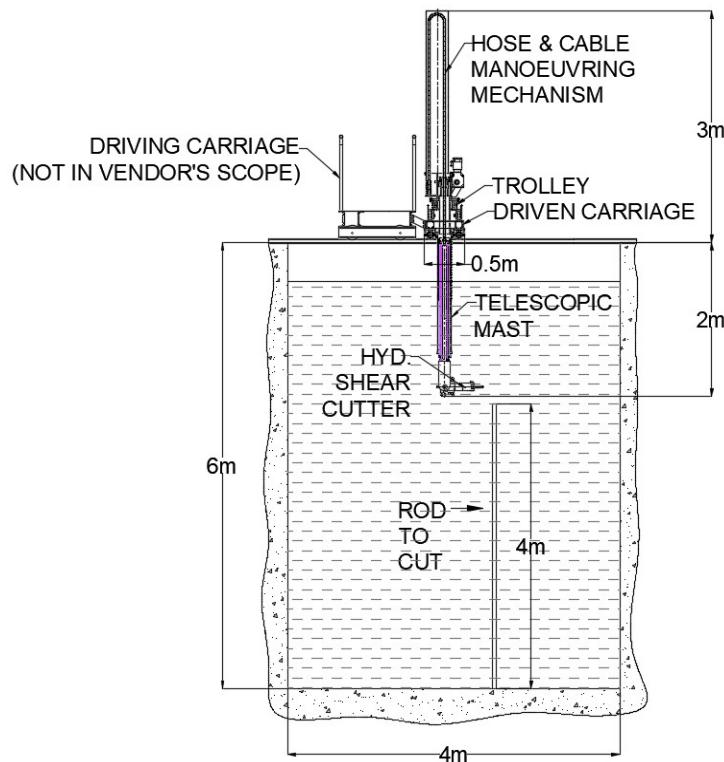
Schematic of Rod Cutting Gadget Assembly
